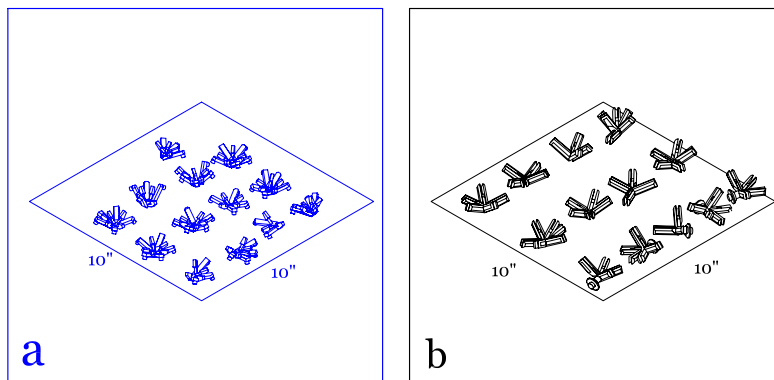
(a) finger joints on print bed, (b) FDM printed finger joints with no support material above the printed joint, parts are positioned flat to the print bed
